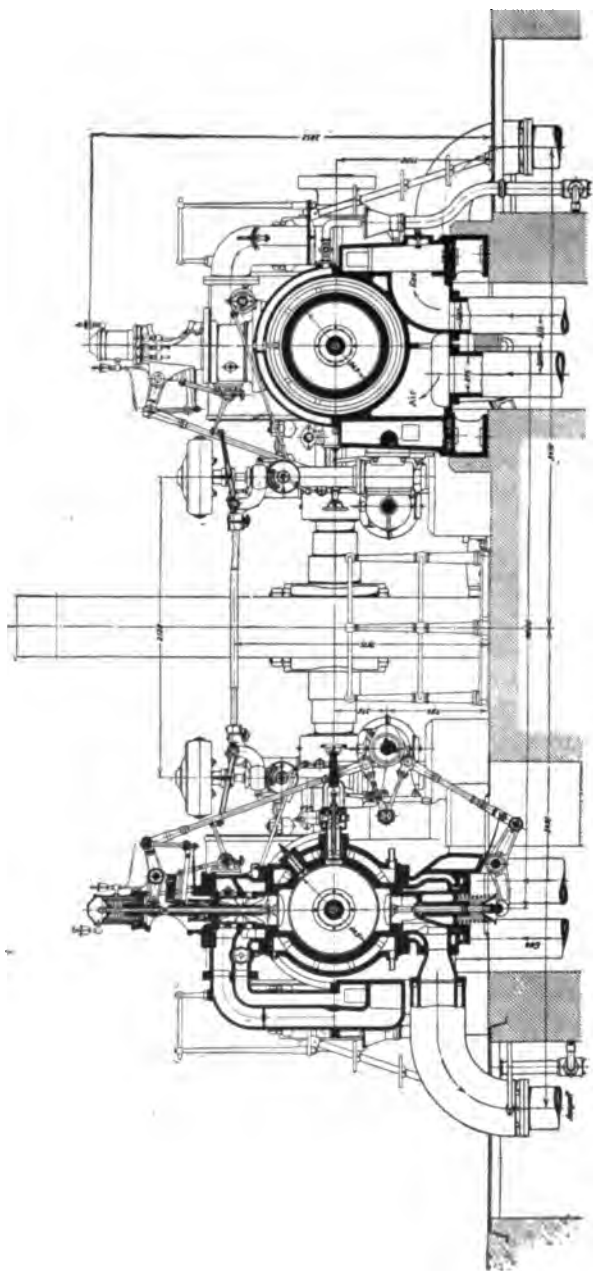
600 B. H. P. Deutz Engine.
